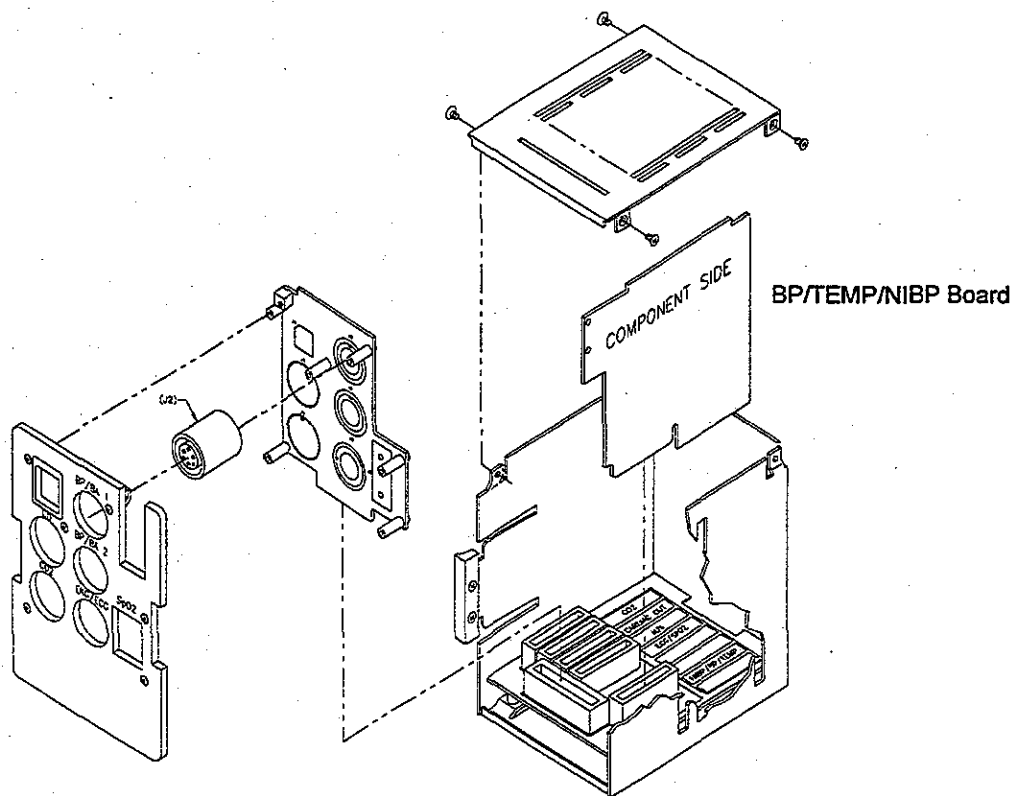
One Invasive Blood Pressure Option - Exploded View
